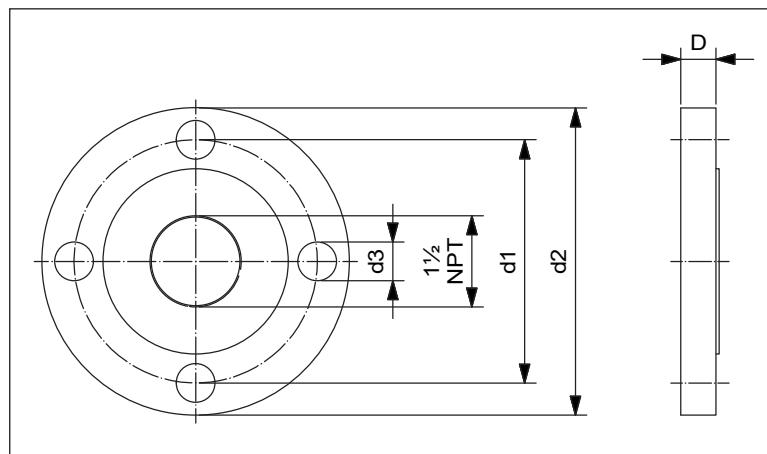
Dimensions of mounting flange (connection dimension in accordance with ANSI/ASME B16.5)
